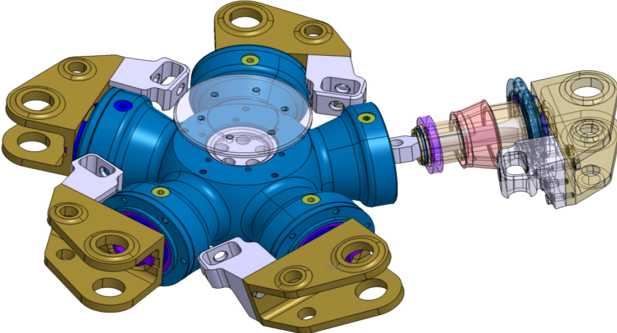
CAD-drawing of 5-bladed Bo105-type hub
